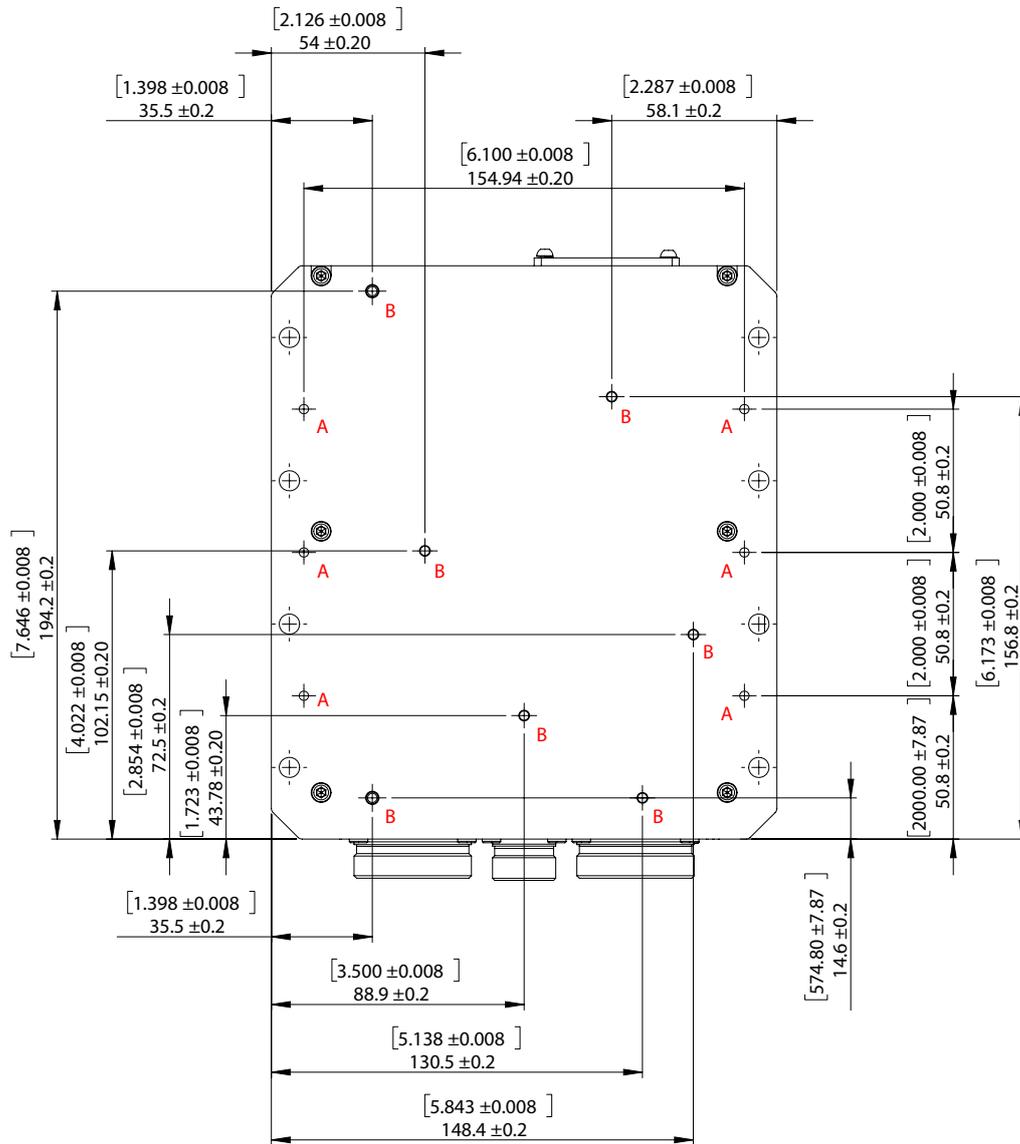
Bottom View of “MC” Enclosure with Mounting Holes
